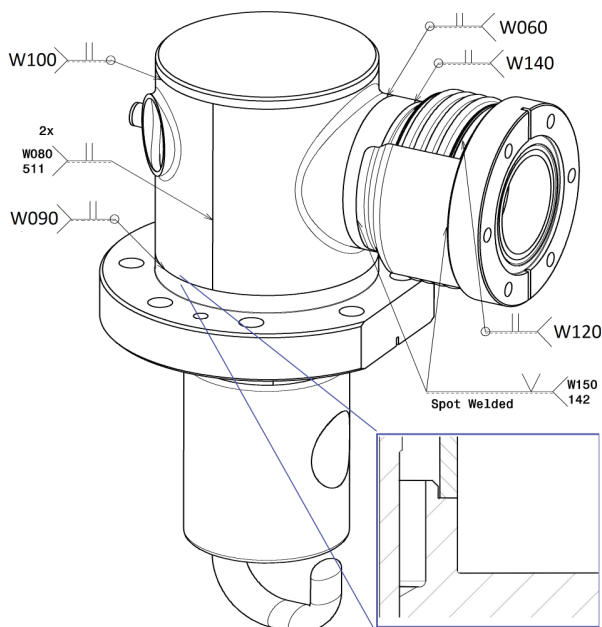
Configuration of the welds. The EBW code (511) is omitted in the critical welds, for clarity of the picture.
